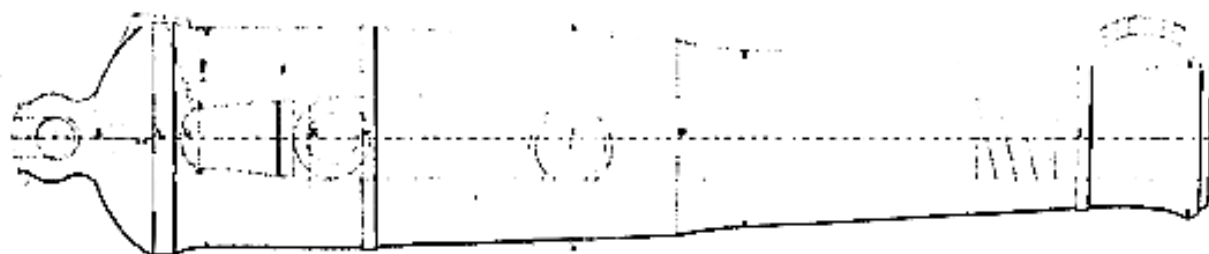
8-inch Millar Pattern Breechloading Gun Engineering Drawing (McConnell 1988:99)
